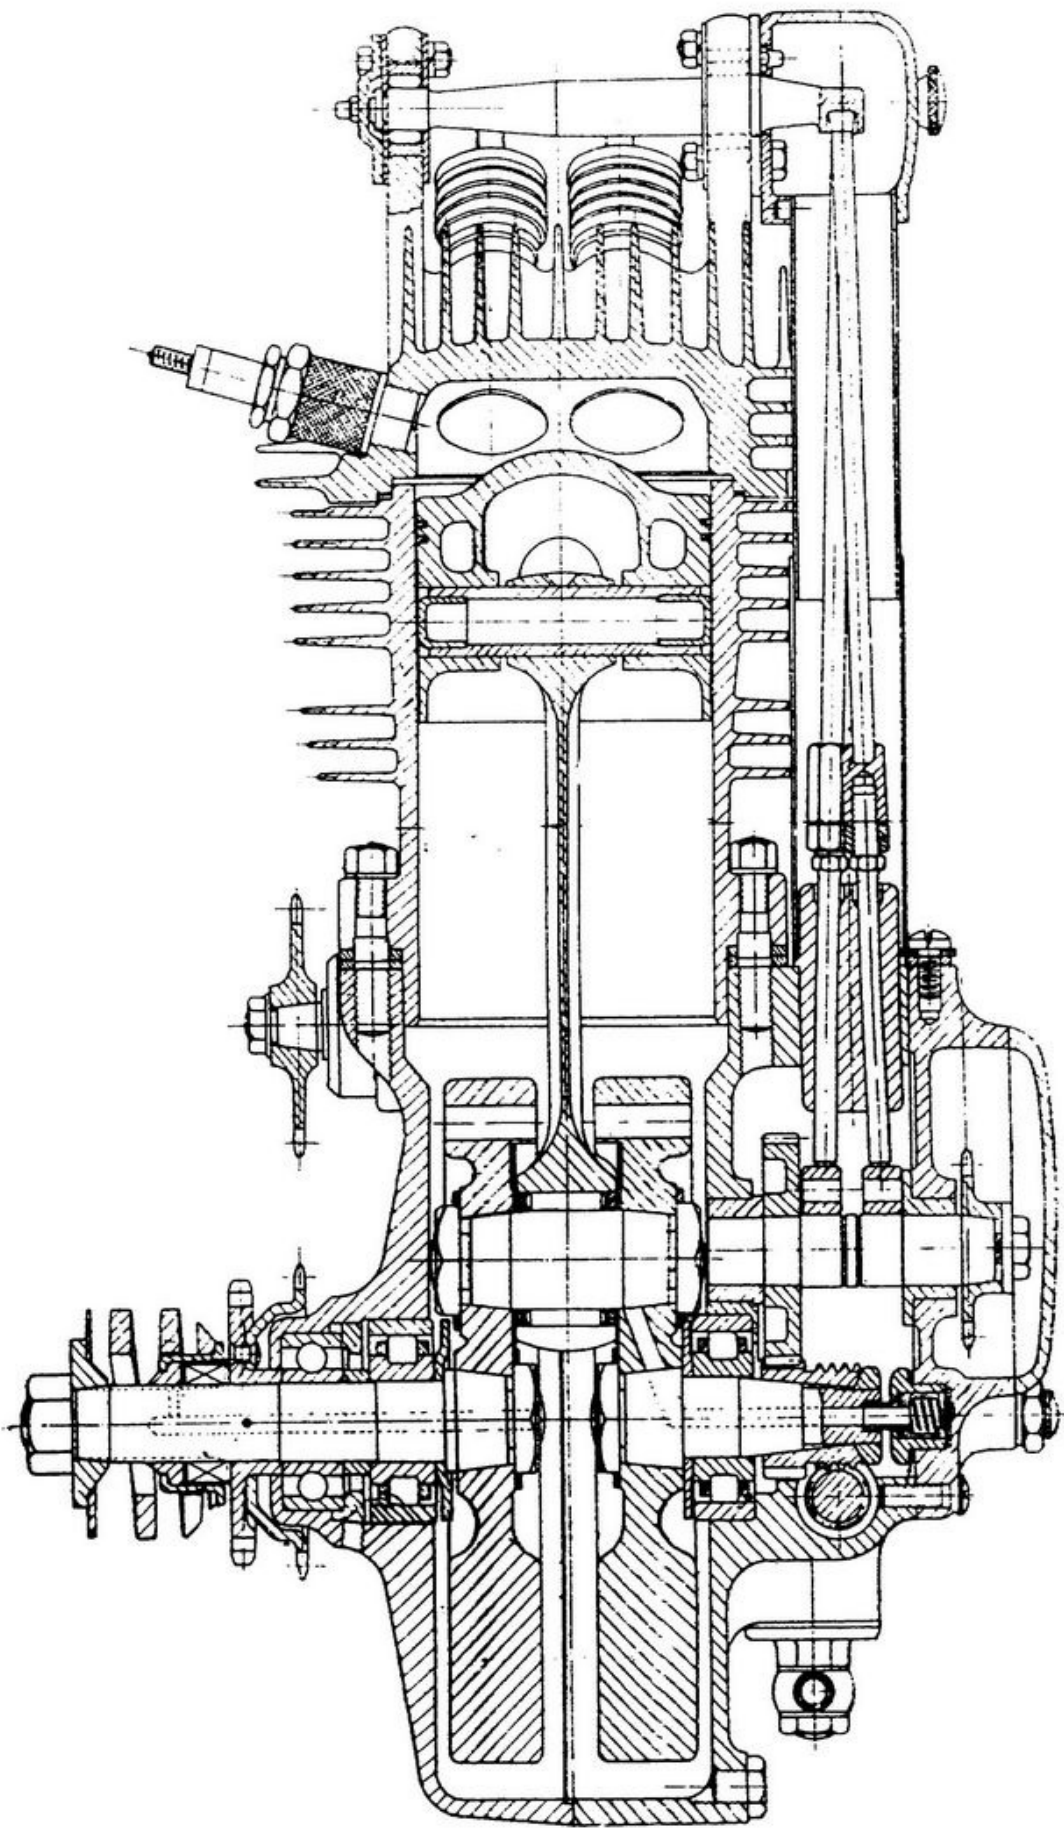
GENERAL ARRANGEMENT 500 c.c. RUDGE ENGINE.
